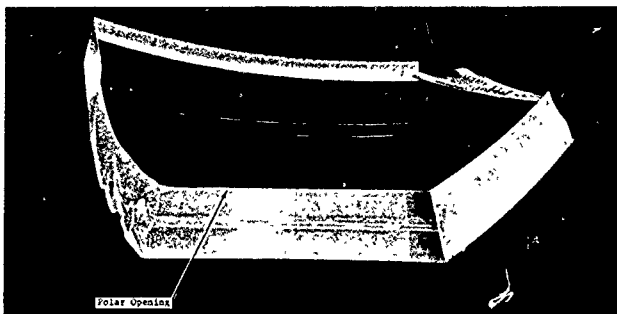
Fragment from the polar pentagon in contact with the top hatch ring; interior surface. Note only minor cracking on the acrylic bearing surface.
